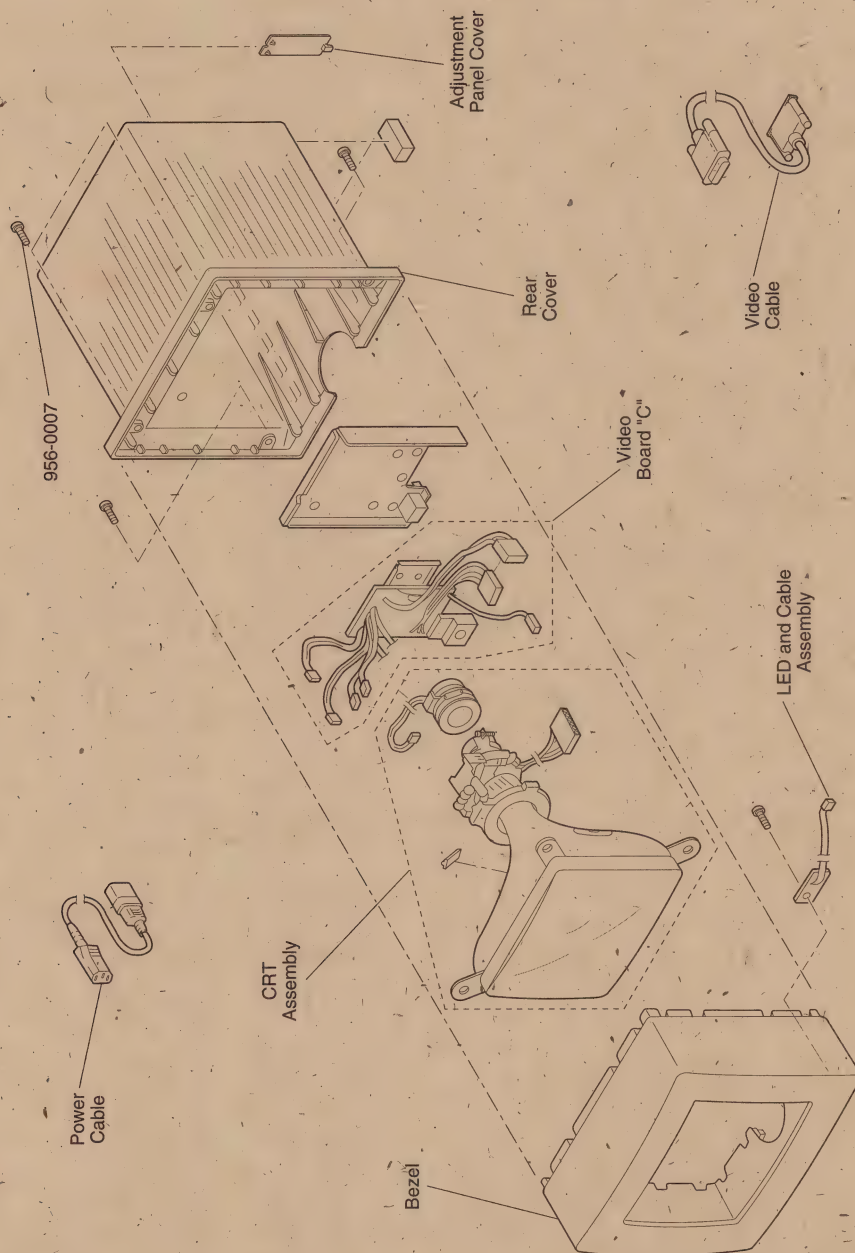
AppleColor High-Res RGB Monitor Exploded View
